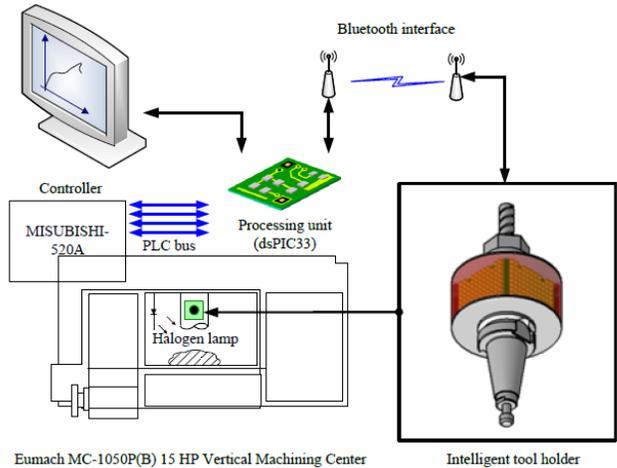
A wireless communication module, a FFT processing unit, internal sensing device, and is capable of monitoring working state of machine tool holder in real time[3].
